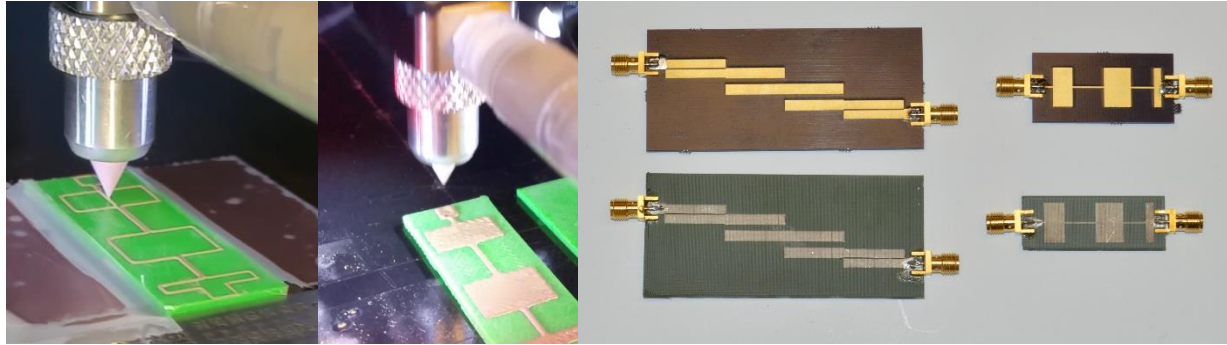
3D Printing manufacturing process compared to conventional PCB filters
